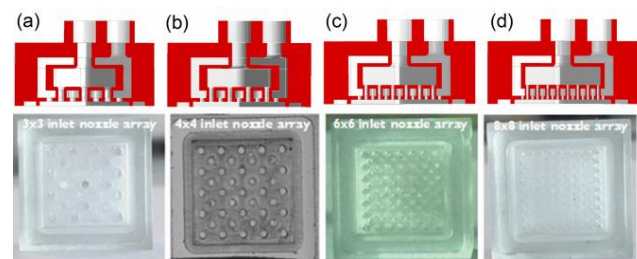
Design (top row) and photographs of the nozzle plates (bottom row) of the fabricated 3D printed coolers for the 4 cooler designs.
